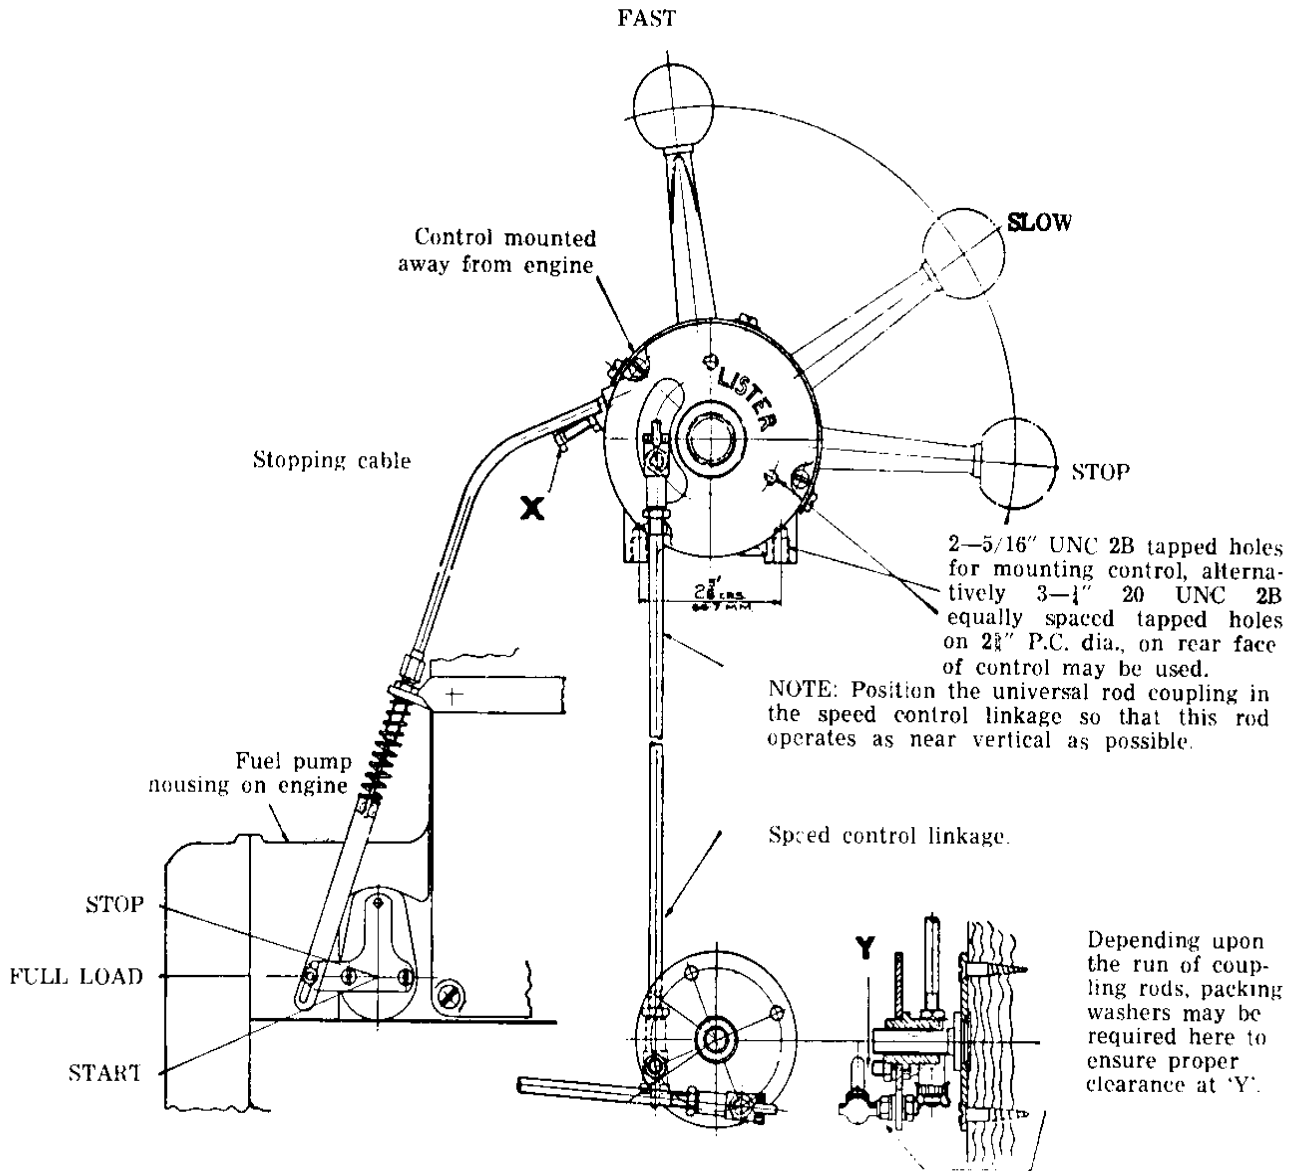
Arrangement of Single Lever Speed and Stop Control
